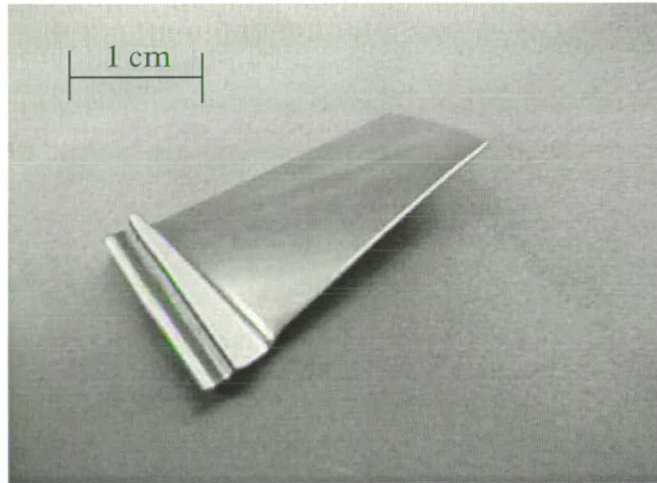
A compressor blade manufactured by the 360 degree ECM process
